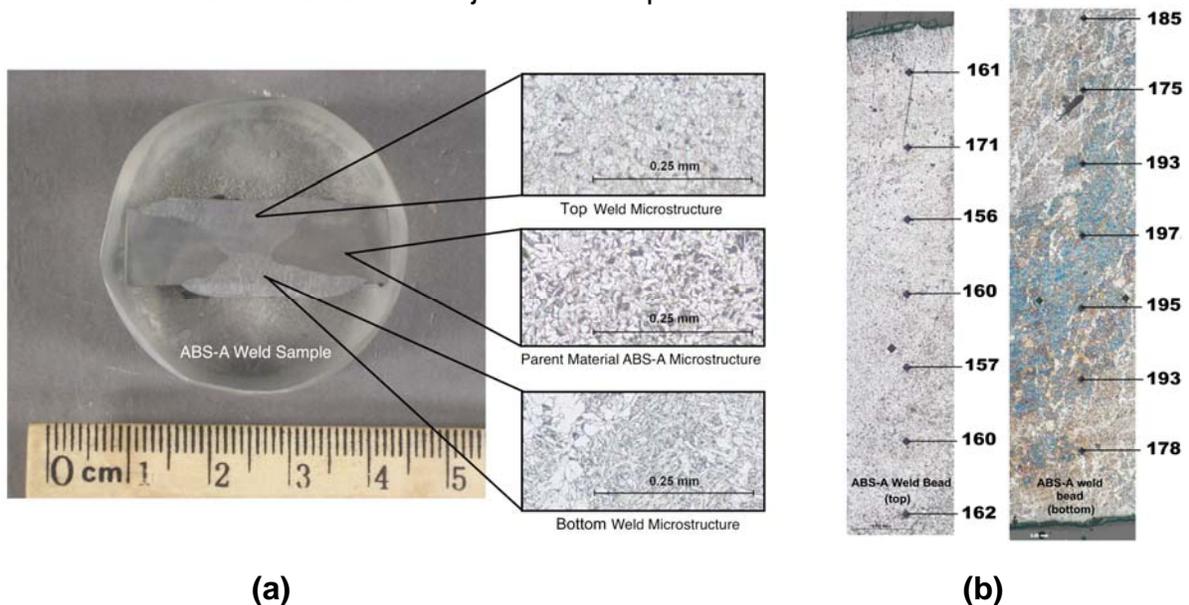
ABS-A weld specimen (a) Cross-section of metallographically prepared specimen illustrating top weld bead, base metal (parent material), and bottom weld bead, and (b) Vickers microhardness measurements of top and bottom weld beads.
